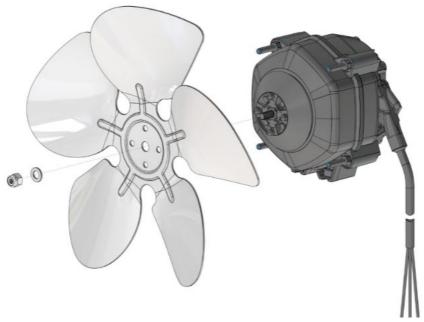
Fan Assembly (external thread shaft) Torque Setting: 3.0 – 3.2N.m
